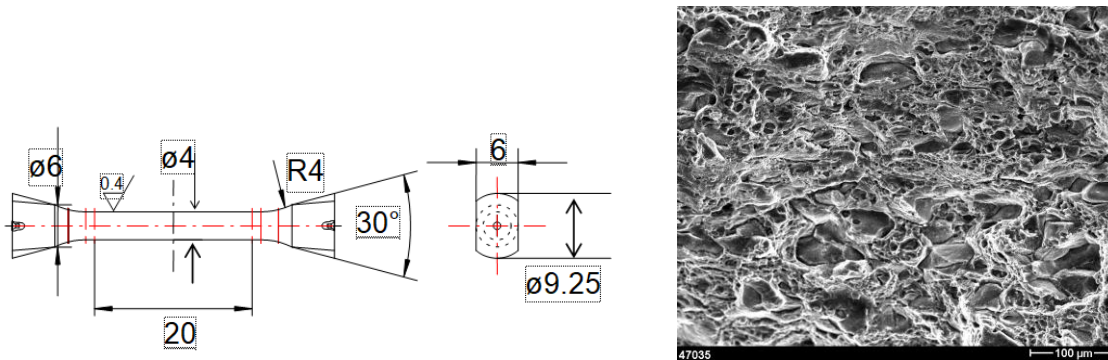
(left) Geometry of the tensile rod; (right) Voids on the fracture surface [IWM]
